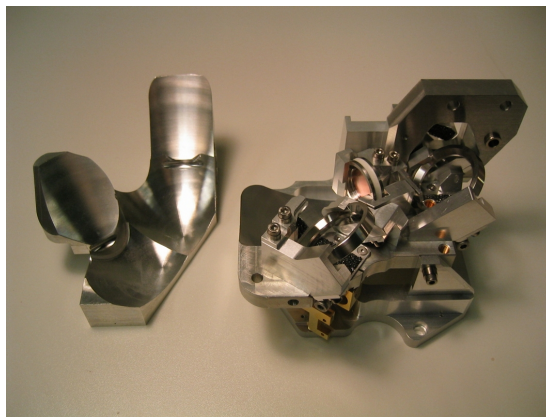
Disassembled view of the Band 9 optics assembly in which the machined mirrors can be seen.
